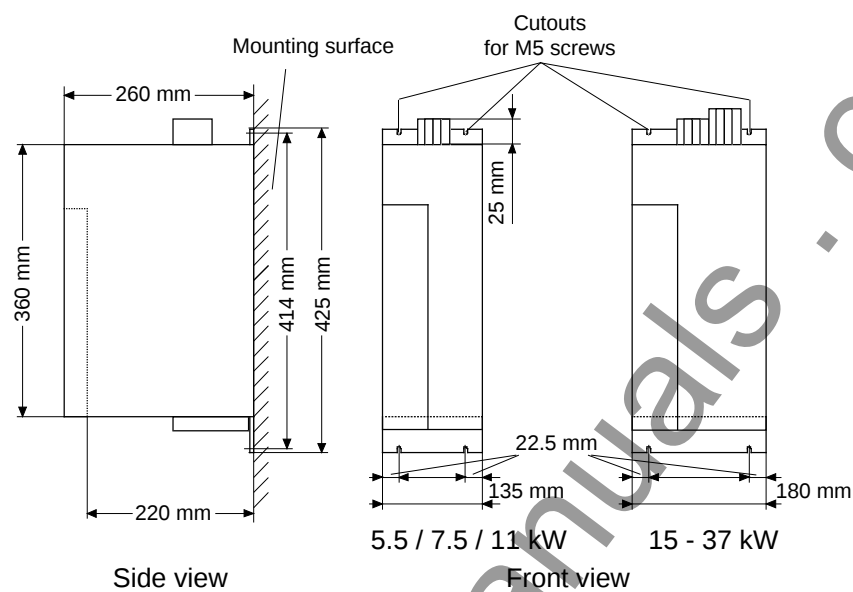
Dimension drawings for housings 135 mm and 180 mm wide
